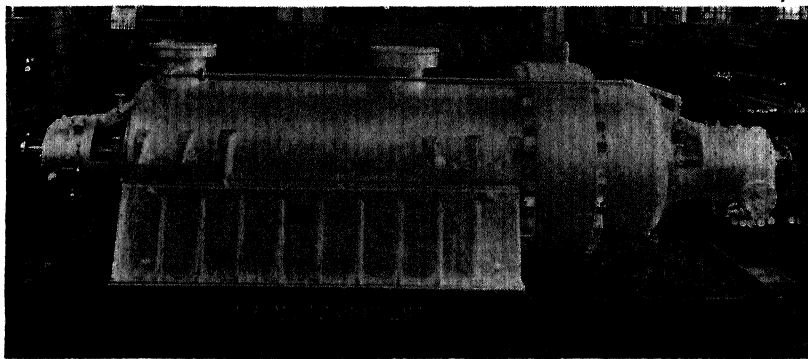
Centrifugal pump of welded steel construction designed to lift 887 g. p. m. to a head of 8275 ft.—said to be a world's record for this type of pump.
